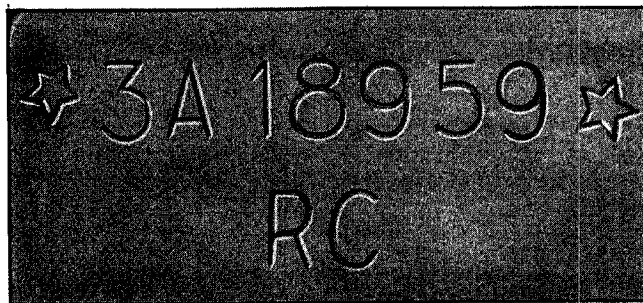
Typical Unit Number and Model Number As Stamped on Cylinder Block of Single Engine Units.
